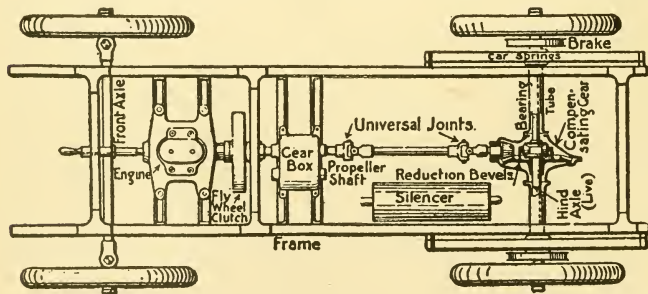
Chassis of an automobile. Plan showing arrangements of the parts of which the chassis is composed. They are, the frame, the power plant, the running gear, and the steering gear.
